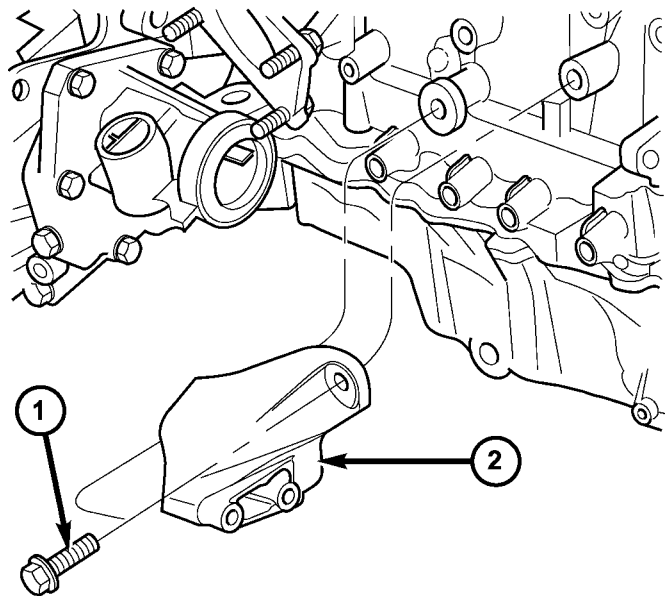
Intermediate Shaft/Bearing Assembly—2.4L Turbo Models
